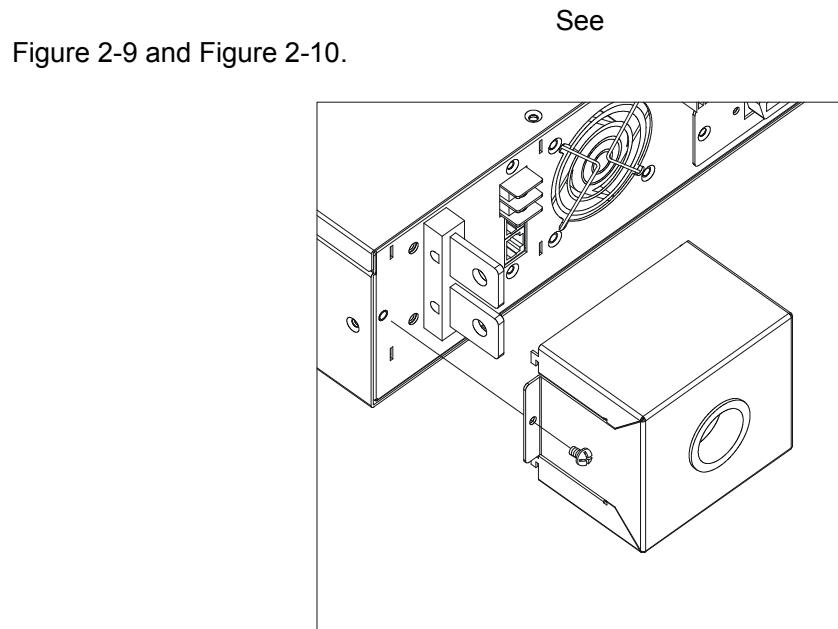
Assembling the Rear Safety Cover of the 62006P, 62012P and 62024P
